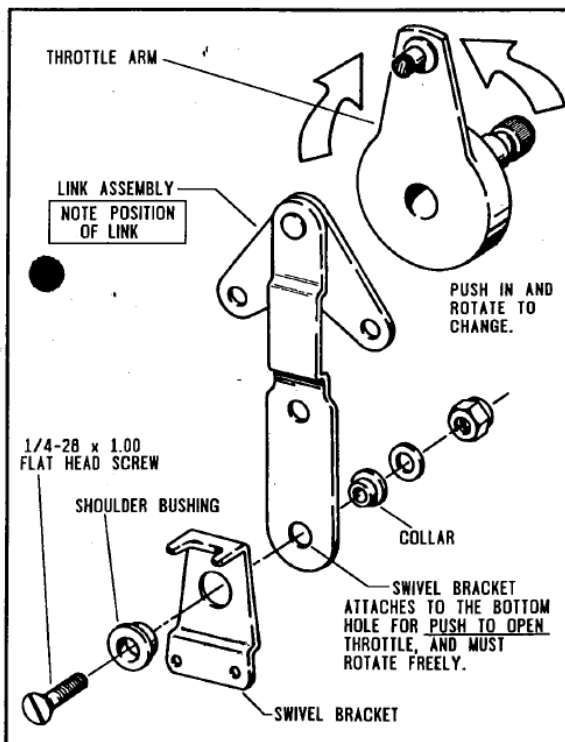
PUSH-TO-OPEN CONFIGURATION
